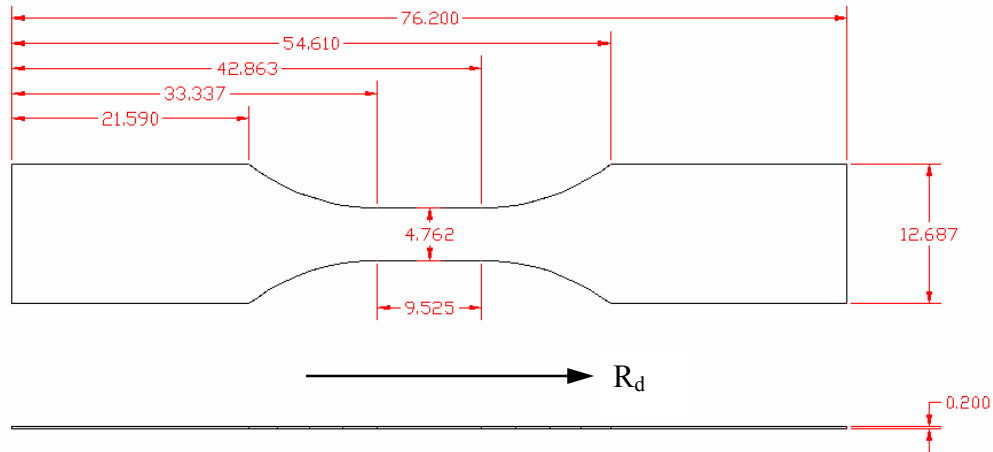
Dogbone specimen with an arrow indicating the rolling direction, R_d , with dimensions in millimeters.
